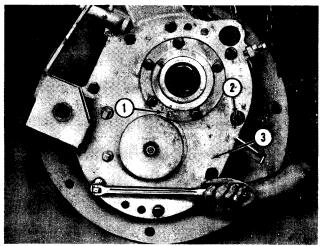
REMOVING GEAR COVER 1. Bearing Retainer 2. Capscrew 3. Cover
